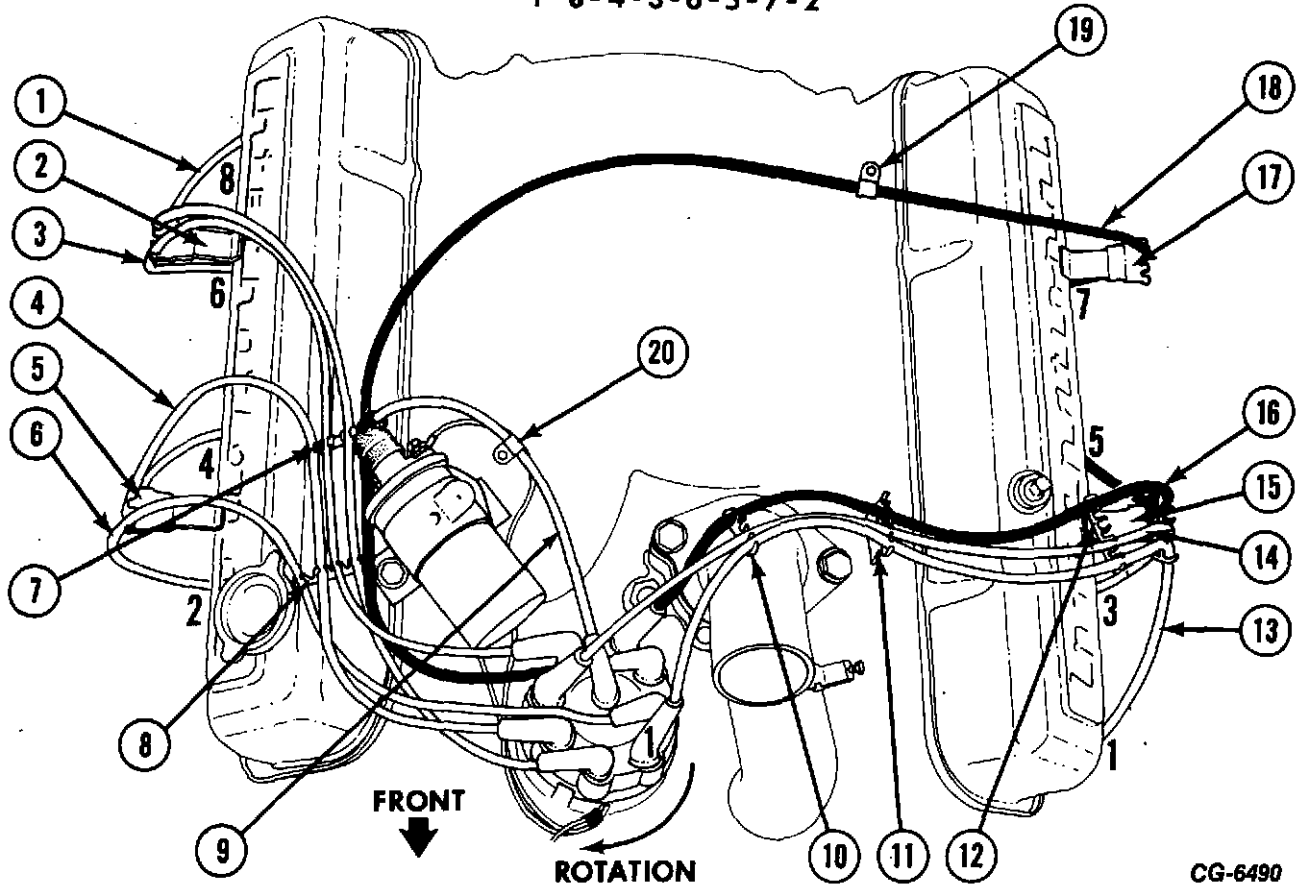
SPARK PLUG CABLE ROUTING FOR C-304, 345, 392 ENGINES
